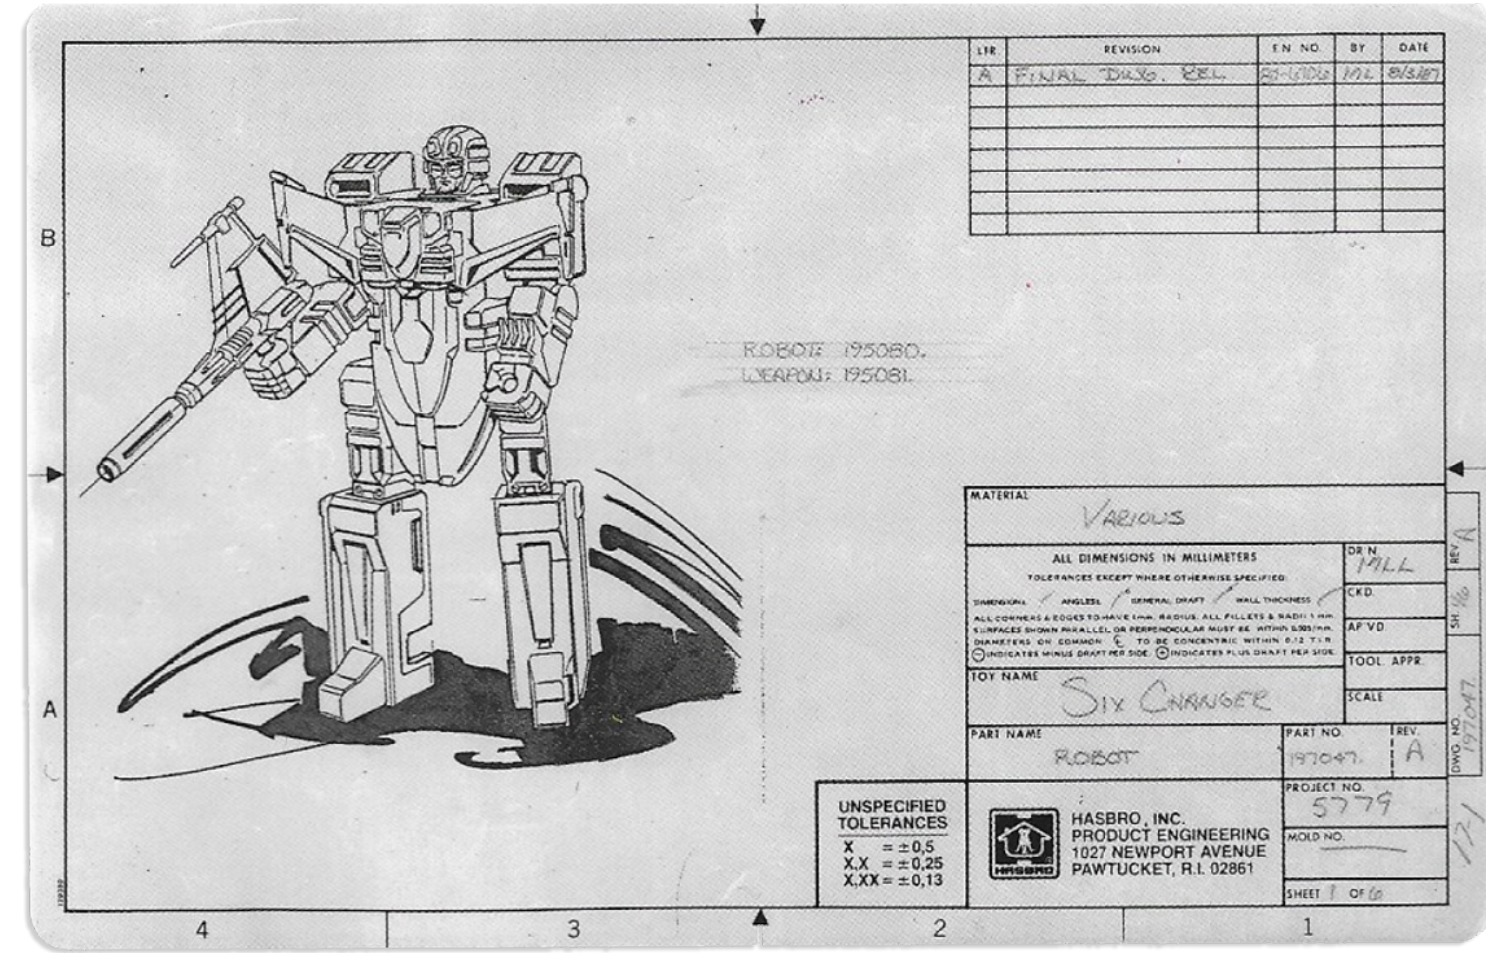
Technical drawing Quickswitch, Generation 1 (Sorenson 2019, 112)
